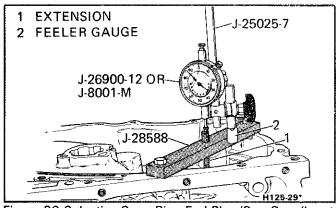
Selective Snap Ring End Play (Sun Gear/Input Drum)
